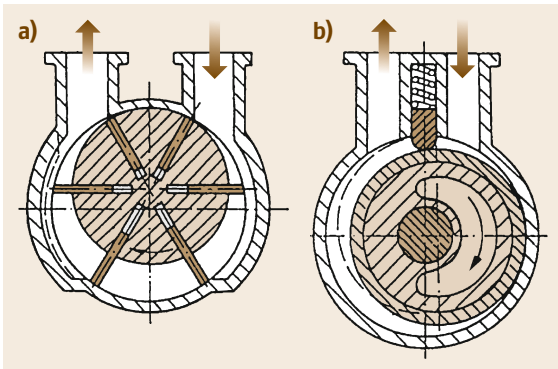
,b Circulation piston design. (a) Cell pump, (b) rotary piston pump
